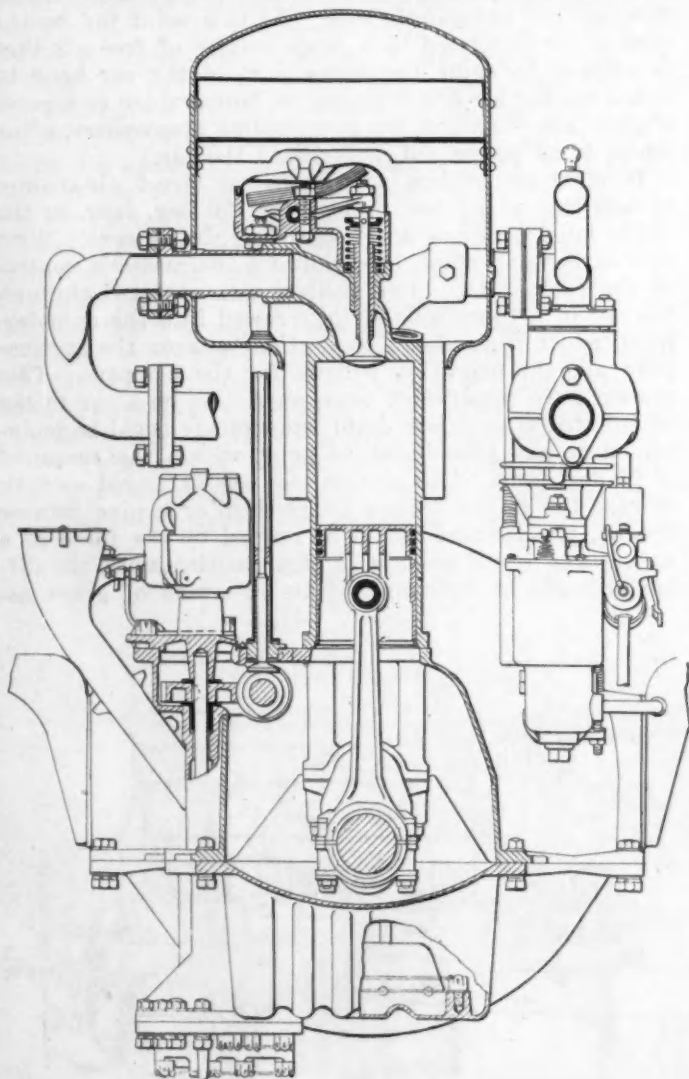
FRONT ELEVATION PARTLY IN SECTION OF THE FRANKLIN ENGINE SHOWING THE ARRANGEMENT OF THE CYLINDER CONSTRUCTION
